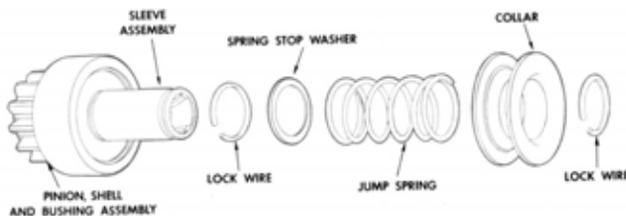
Disassembled view of early type intermediate duty sprag clutch drive assembly.
